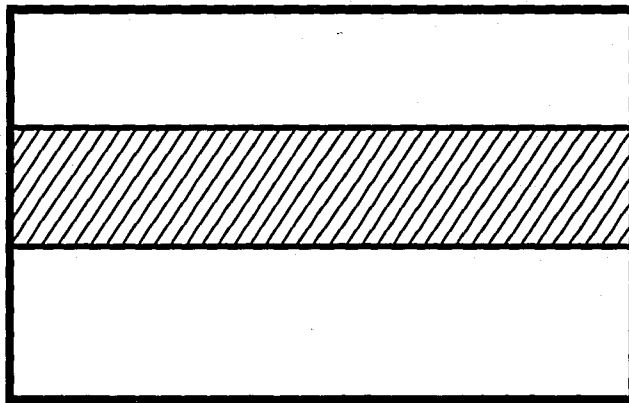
Schematic illustrating as received welded autogenous B2 sample and mounting perspectives. Shaded regions represent weld fusion zone.
